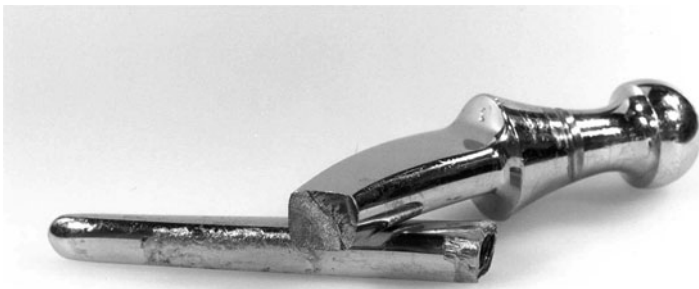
The explanted broken Charnley prosthesis of Fig. 2.1. The lower part of the stem is heavily corroded. On the fracture surface, the progressing crack (*lower left*) and the ductile fracture (*upper right* on the fracture surface) can be clearly distinguished
